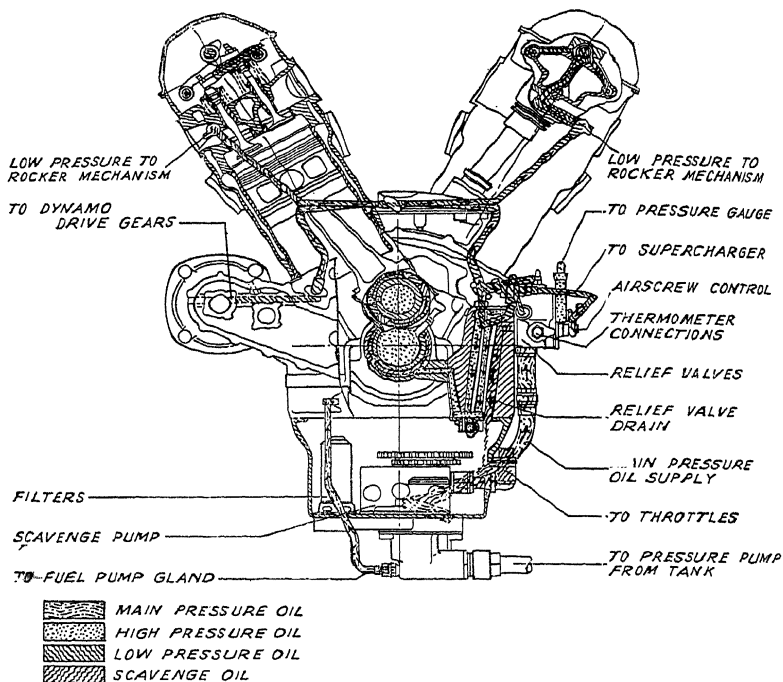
The Rolls Royce "Merlin" engine lubrication system in front sectional view.
